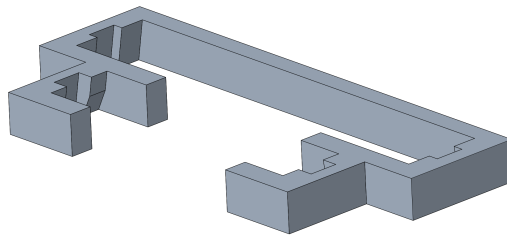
Attachment bracket to insert the lightning brackets into.
